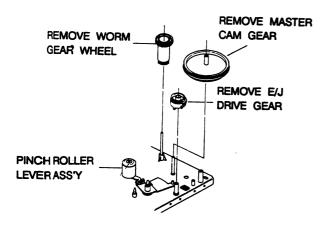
Worm Gear Wheel, Master Cam and Eject Drive Gear Removal.
